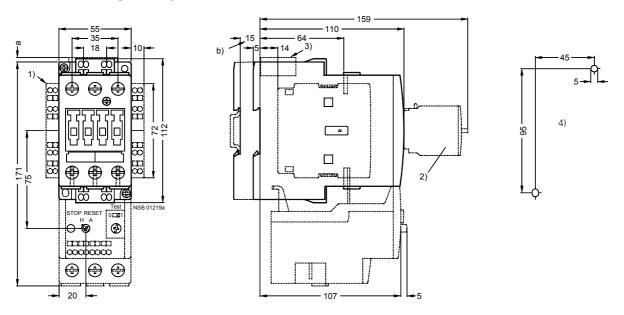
3RT10 3 contactors (Cage Clamp-connection) with surge suppressor, auxiliary contact block and installed overload relay
